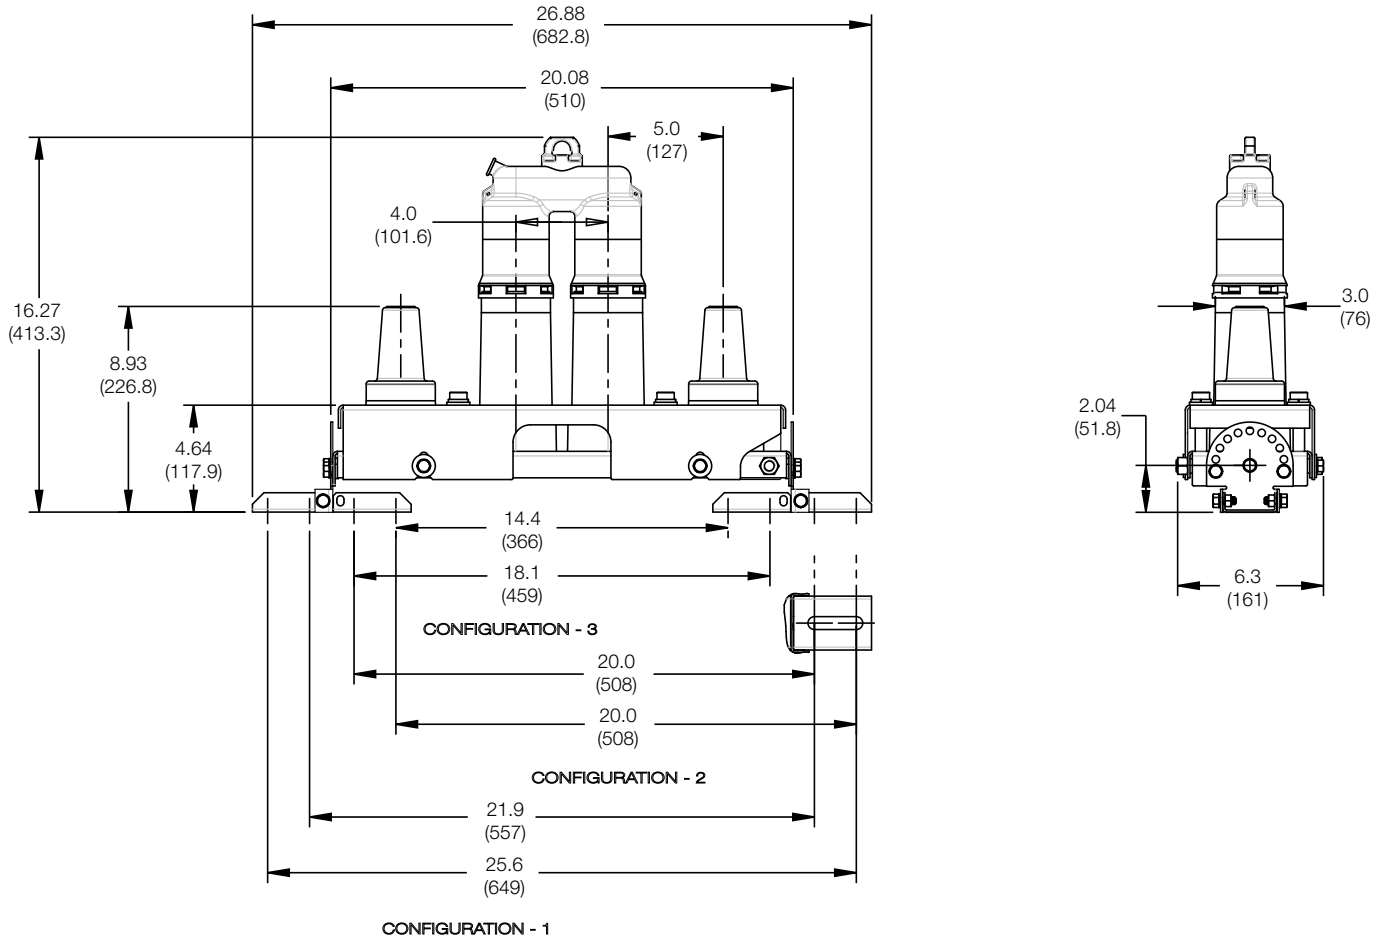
Dimensional drawing shows mounting configurations for in-line bracket.
